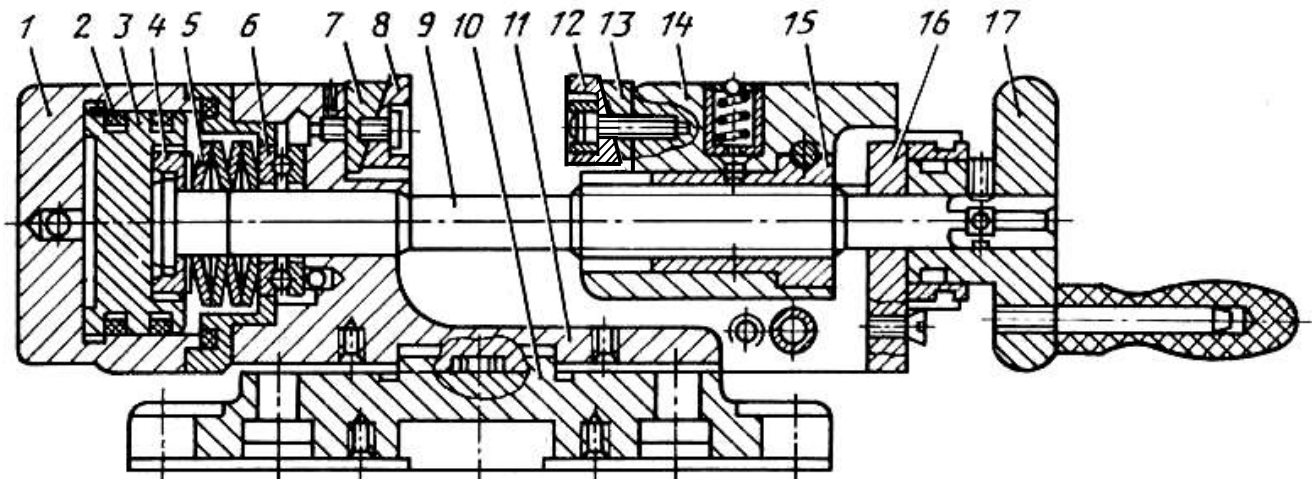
Design of vice with spring-hydraulic mechanism
